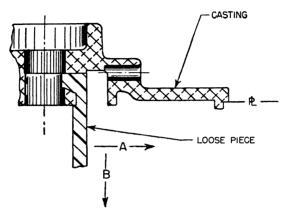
Using a loose die piece that is ejected with the casting and removed from it by sliding the piece first in the direction of arrow A, and then in the direction of arrow B.
